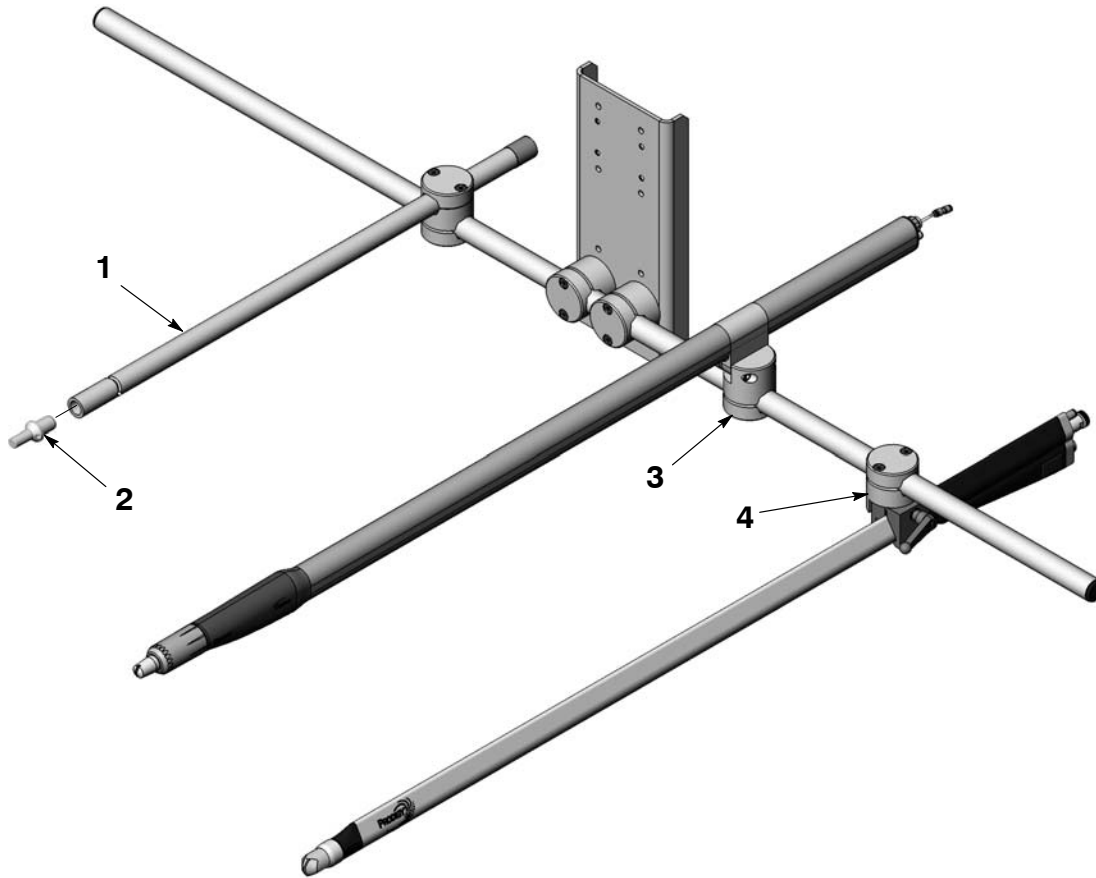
Bar-Mount and Horizontal Gun Mount Kits
